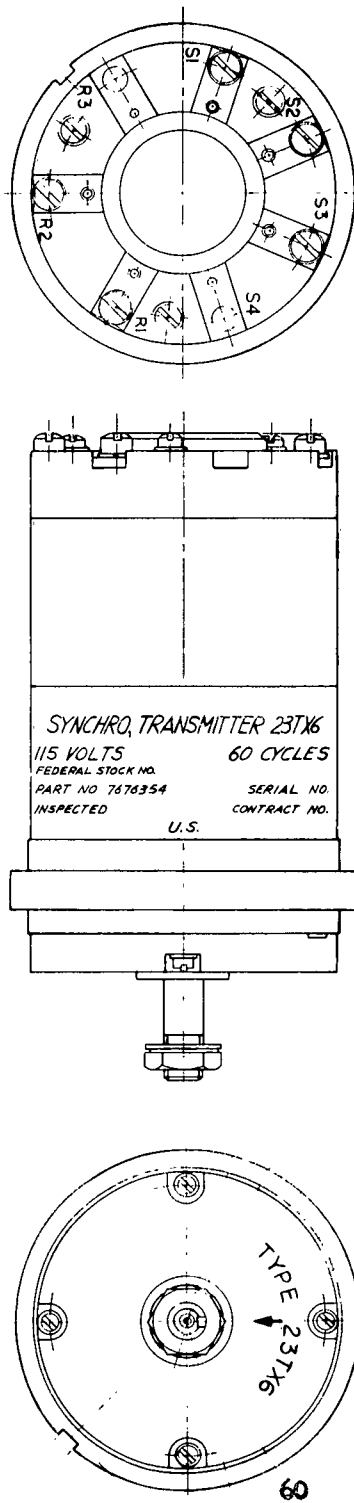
Synchro, Transmitter Type 23TX6 - assembled view
